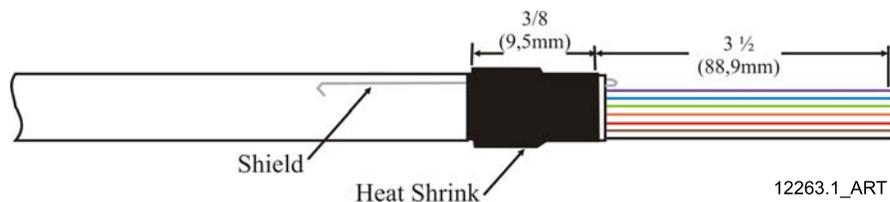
Seven-Conductor Control Head Cable Shield Wire and Heat-Shrink
